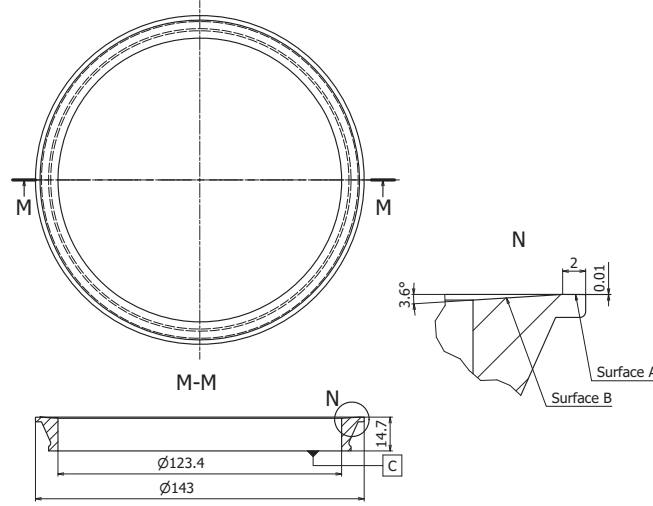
Nominal geometry of workpiece. Only major and relevant dimensions are shown.
